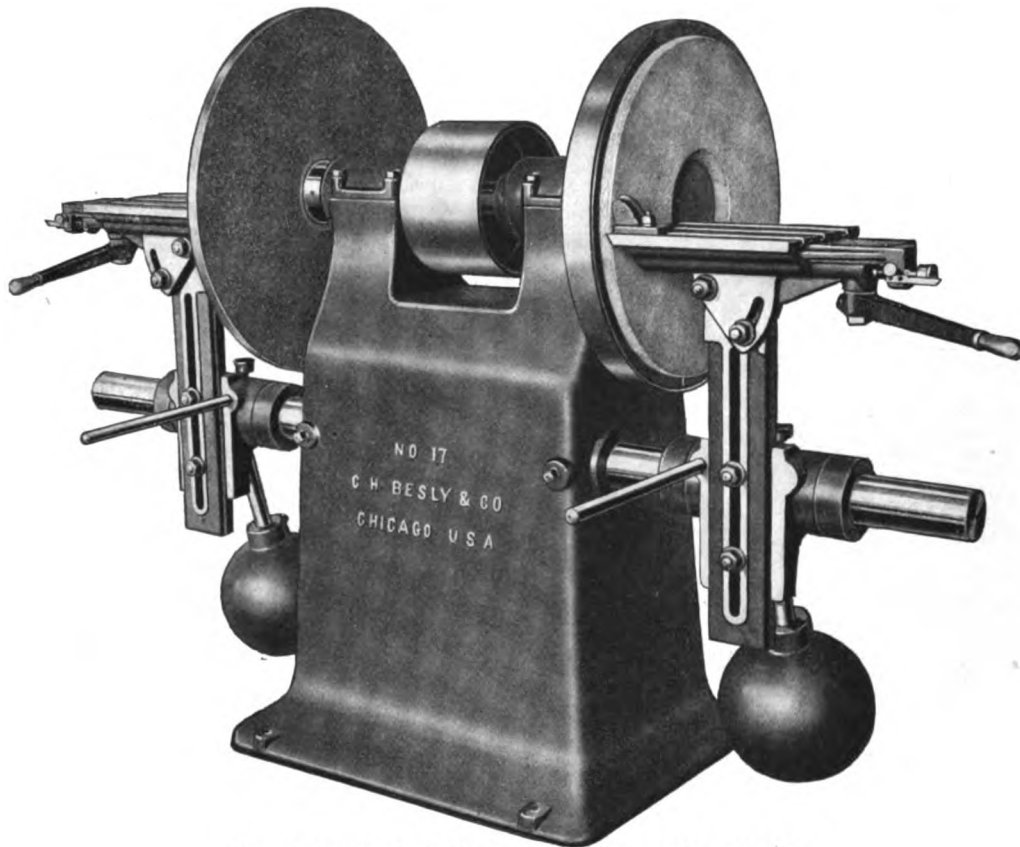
Single Spindle Besly Grinder No. 17-24"L
